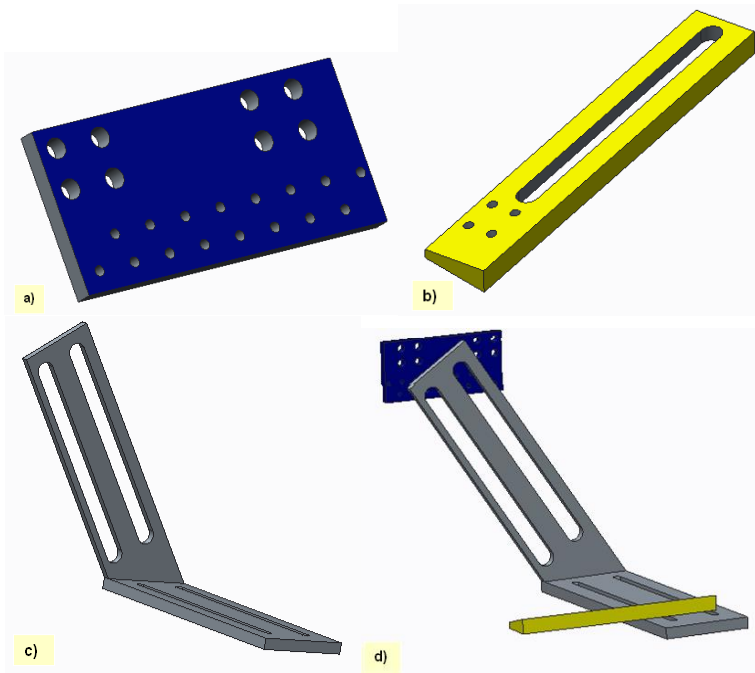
Conceptual design for the HF coil holder. a) Attachment to the SMT machine. b) Rack for coil fixturing attachment and axial distance control. c) Rack for the perpendicular take out of the coil, to avoid collision with the tool. d) Assembled version.
